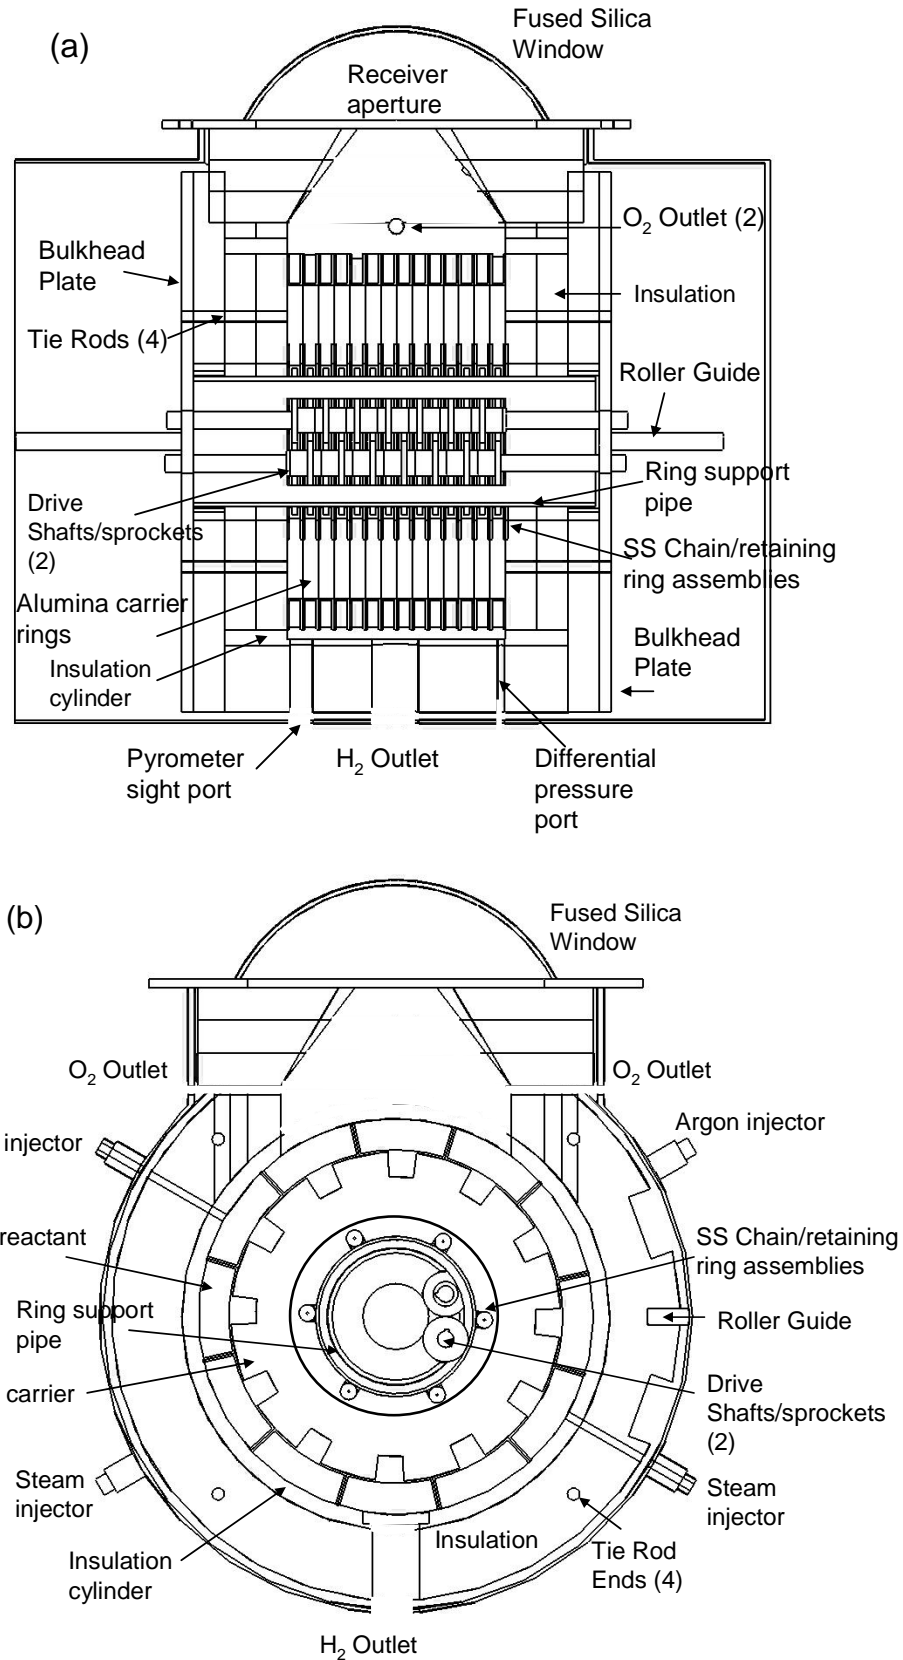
Schematic (a) side view and (b) end view of the CR5 prototype design.
